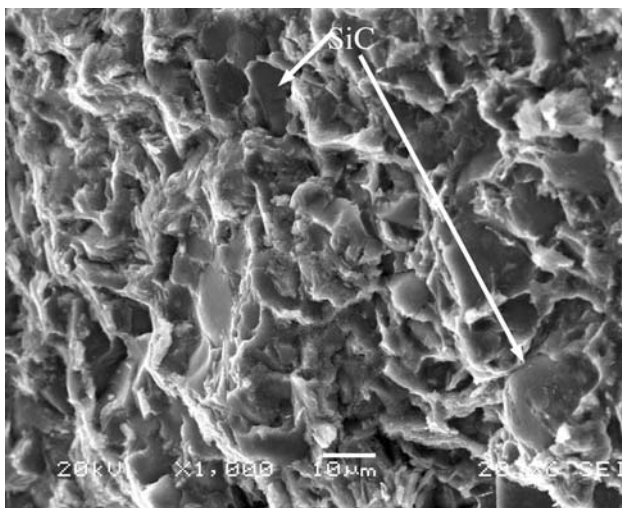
Fractograph of the laser welded joint without Ti filler
